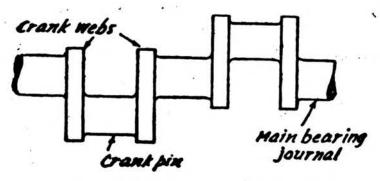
Crankshaft of a multi-cylinder engine.
